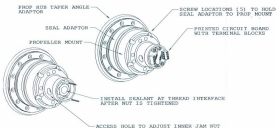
Sealant, adjuster hole and printed circuit board installation locations.
